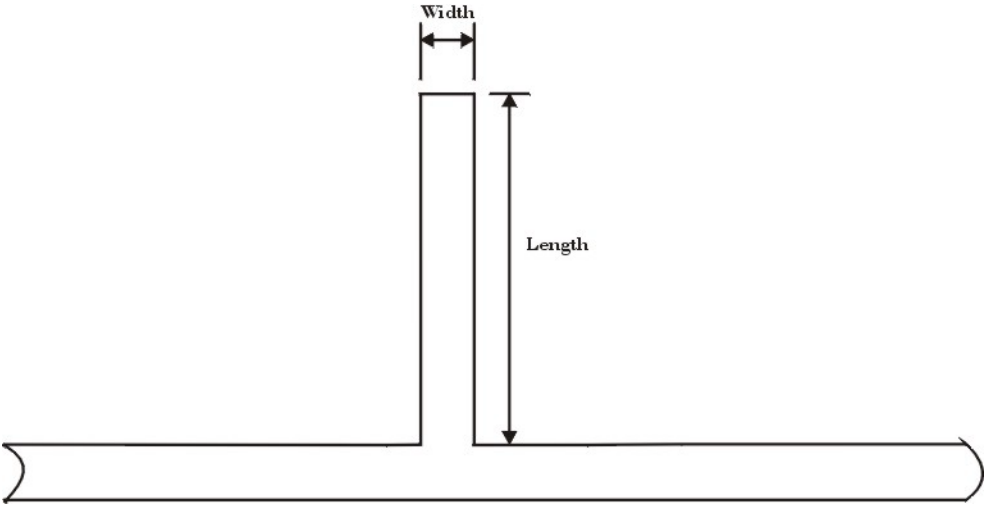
Side view of the impeller showing the length to width ratio. Other blades and details of the impeller toward the hub have been removed.
